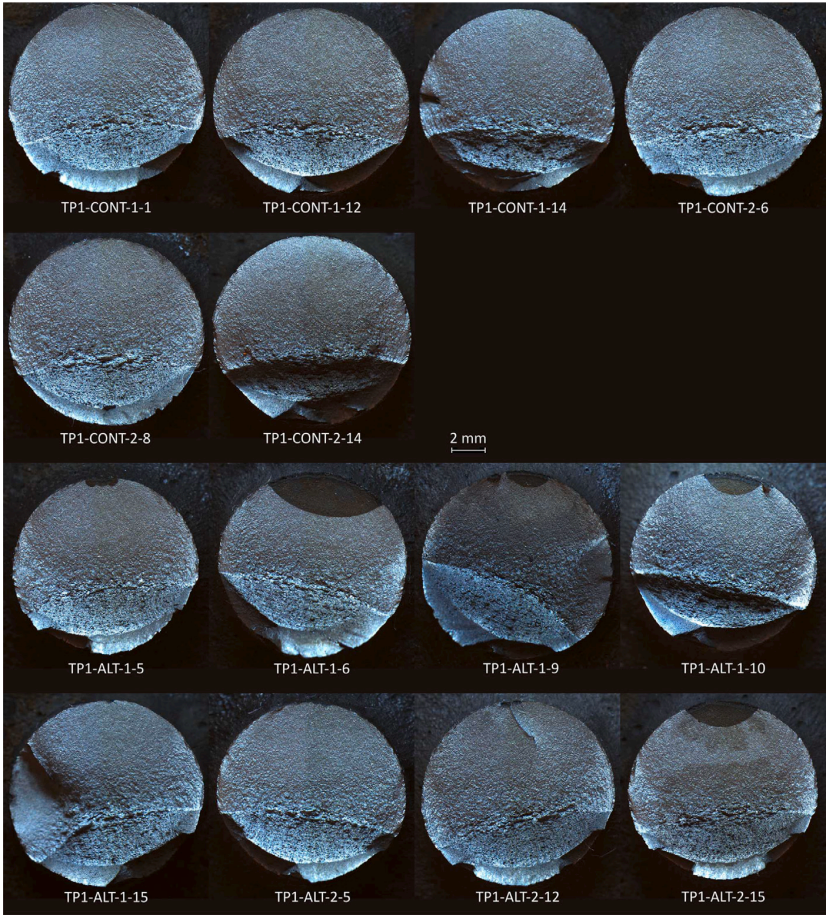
Macrographs of fracture surfaces of specimens from TP1. Codes on the figure refer to the specimen IDs stated in Table B.2.
